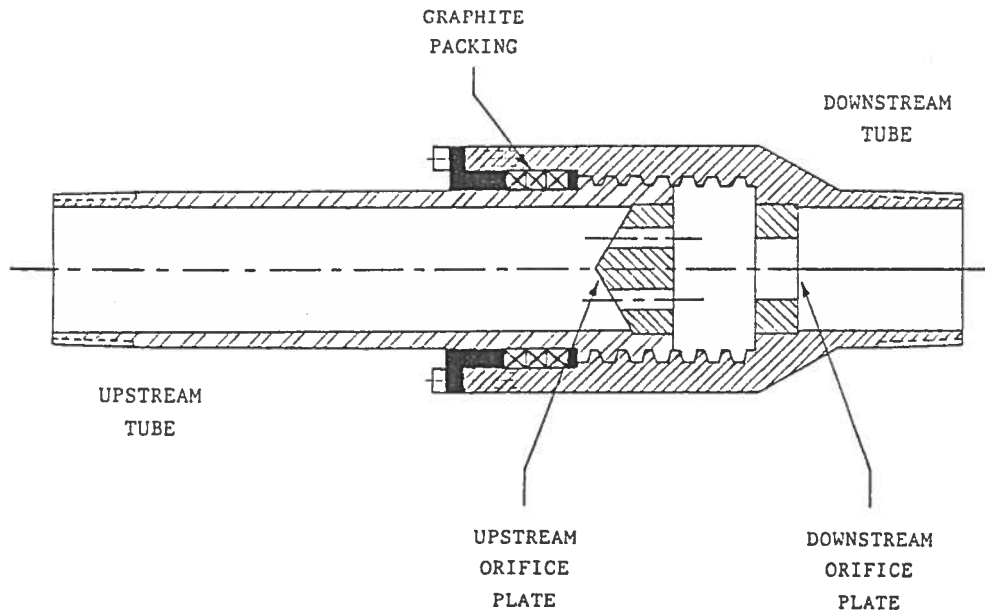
MODEL I PROTOTYPE FLOW MODIFIER
